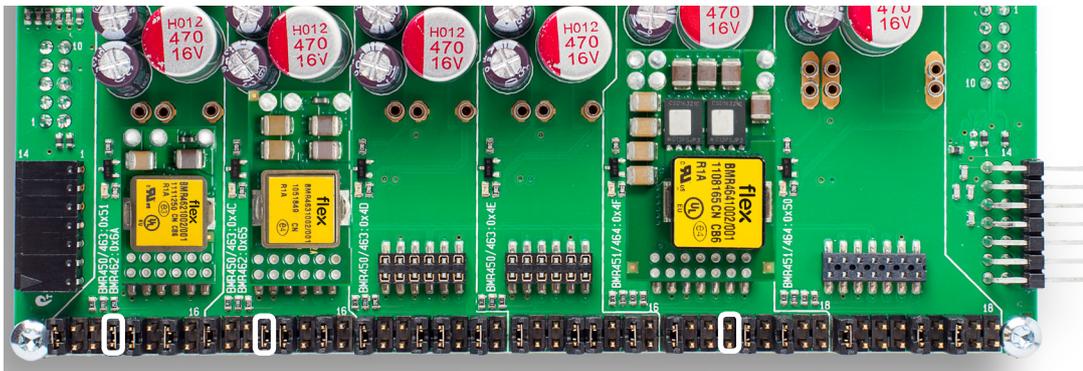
Setting up 3E POL Board (ROA 128 3836) jumpers for GCB Based Sequencing.
